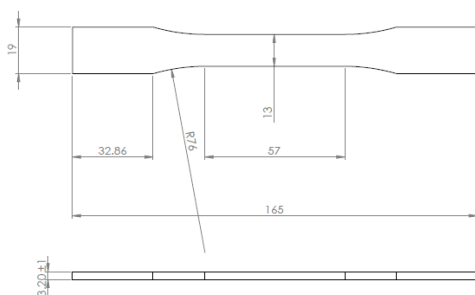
ASTM D638 standard dog-bone sample' dimensions [53].
